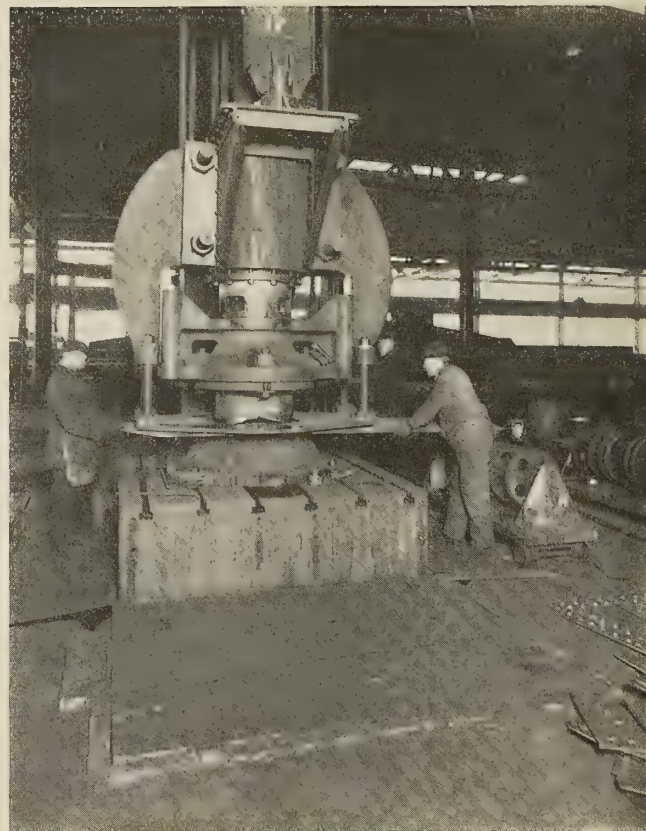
R. D. Wood Hydraulic Manhole Punch and Flanging Machine in Plate Shop
